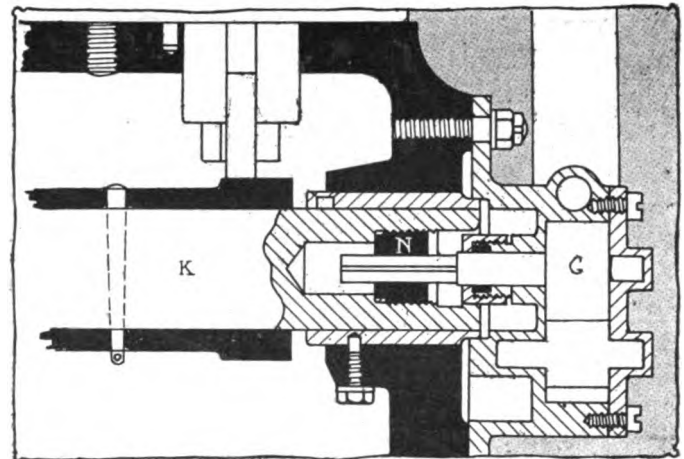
Oil pump gear G, of the oil pump attached to crankshaft. Note the compression release combined with the cam, keyed upon the crankshaft by a tapered pin
